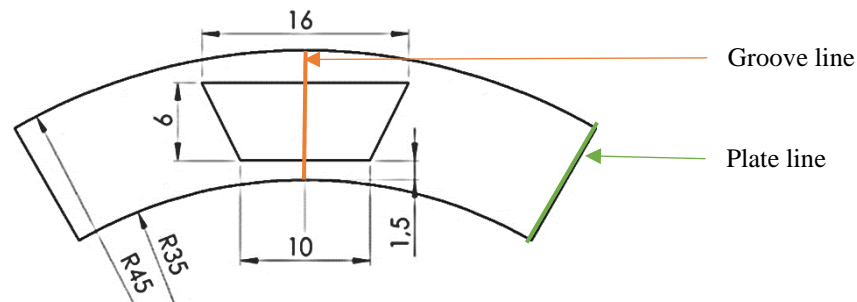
Sketch and geometric dimensions of the groove in the plate
